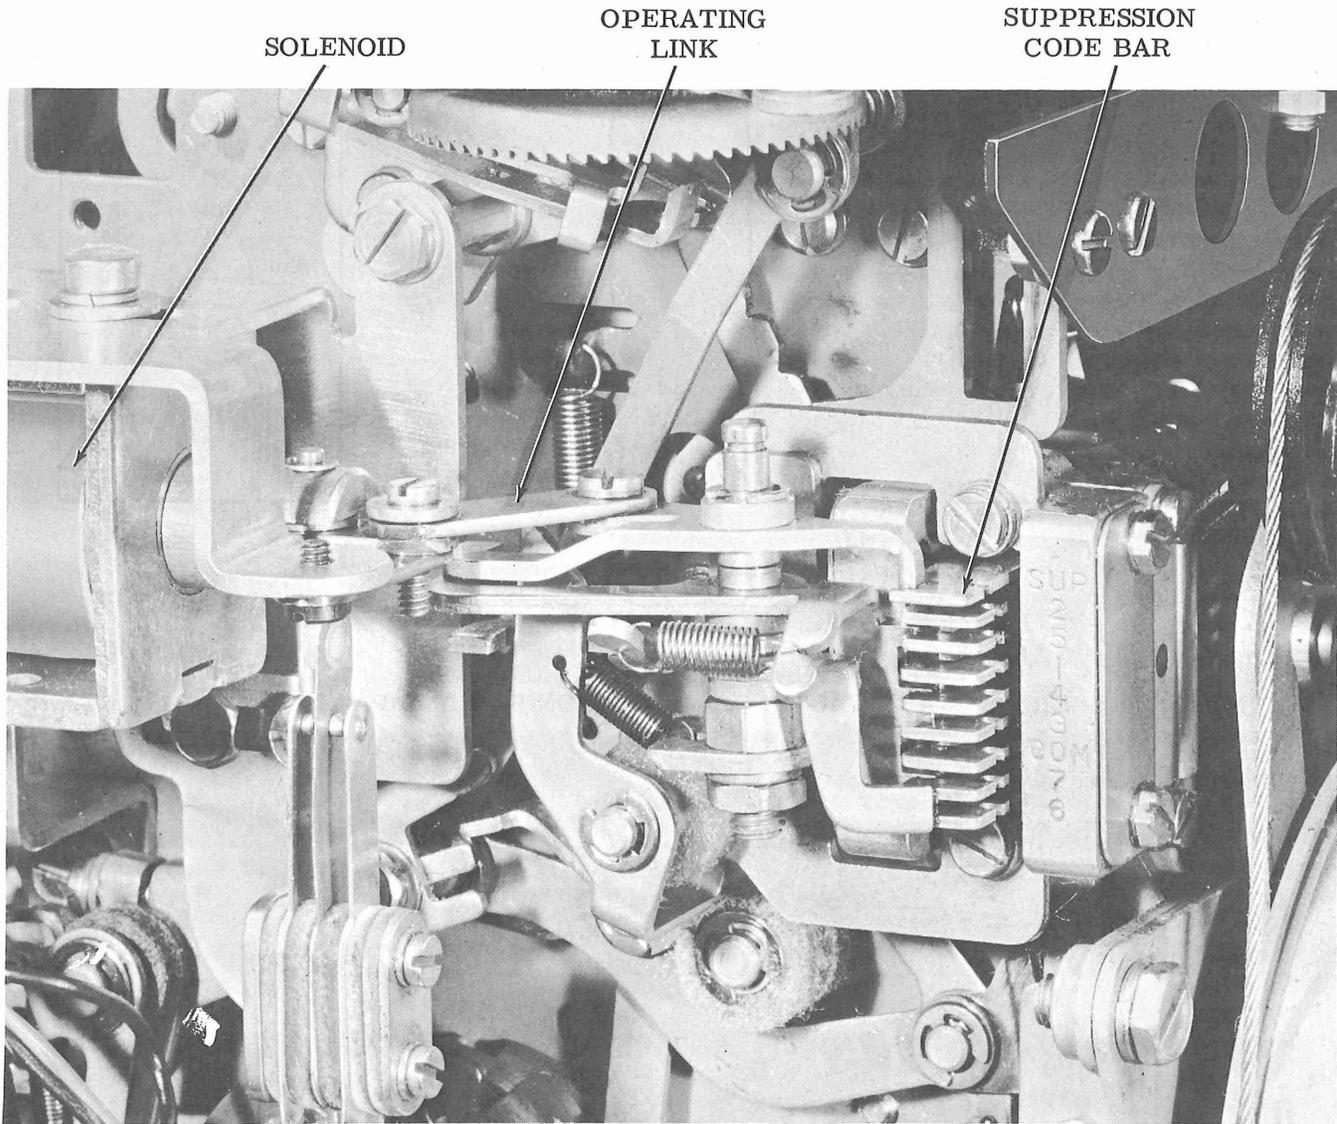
Print Suppression Mechanism Mounted on Typing Unit
